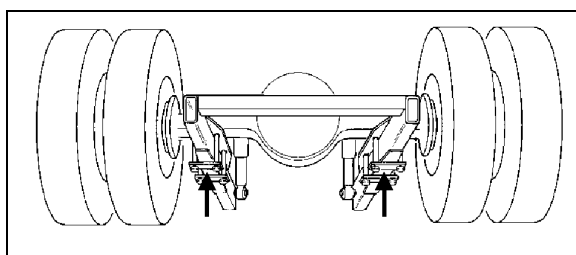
JACKING POINTS ON DRIVE AXLE OEH3B762
